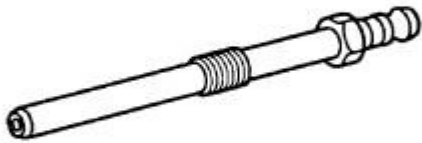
REMOVER, FUEL INJECTOR - 9552
